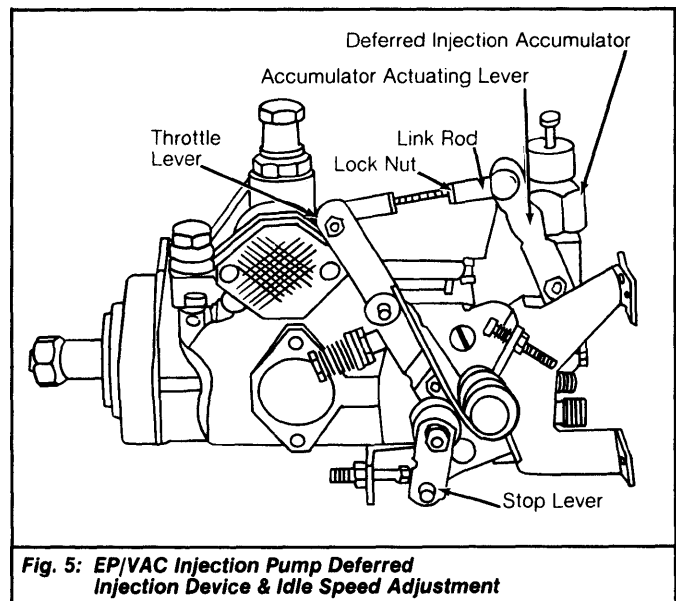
EP/VAC Injection Pump Deferred Injection Device & Idle Speed Adjustment
